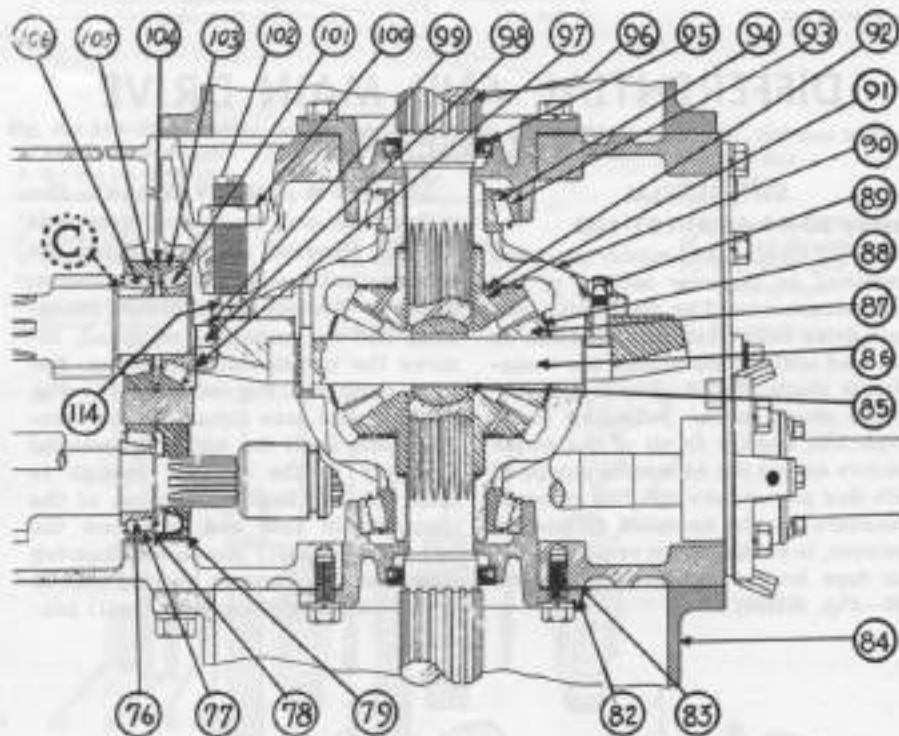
Sectional view showing differential installation on models 81 and 82.
